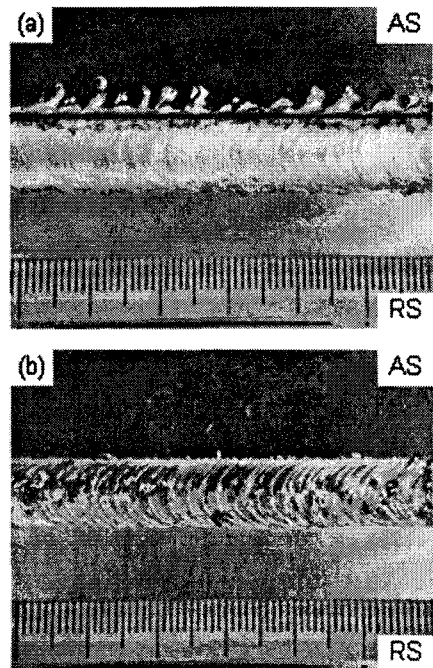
Appearances of specimens friction-stir-welded at a constant tool rotation speed of 1200rpm under various tool traverse speeds of (a) 100mm/min and (b) 500mm/min.
